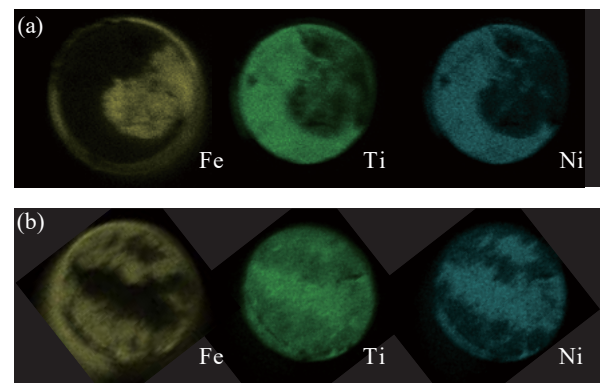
EDX images observed at the fracture surfaces of the joints directing welded for: (a) J1 and (b) J6.
